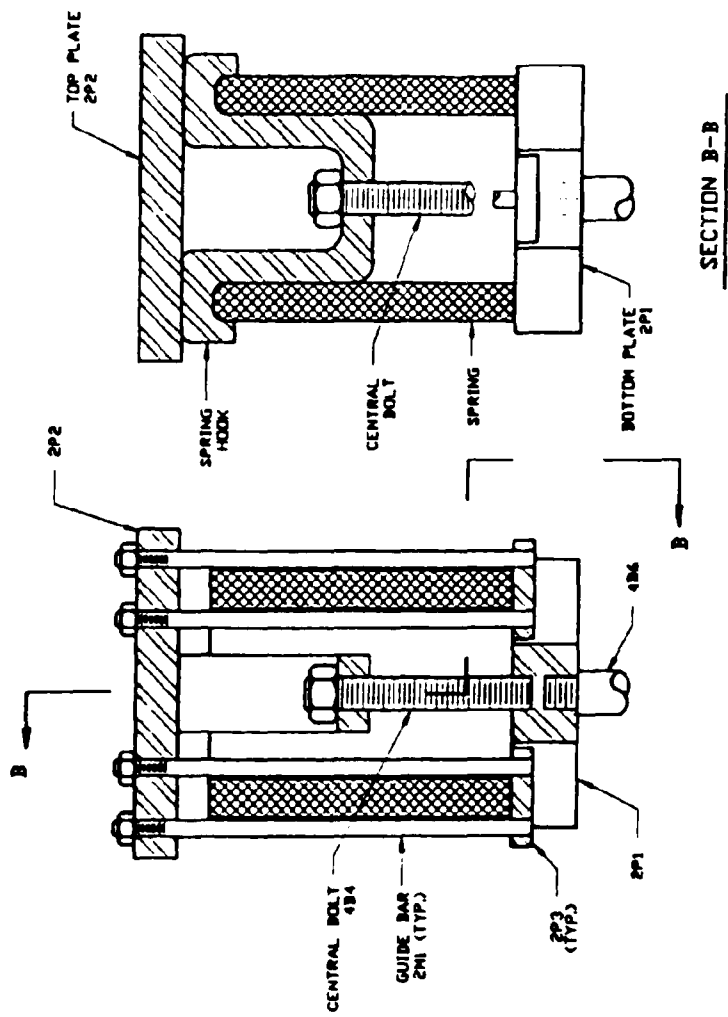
Spring Assembly in Displacement Control Device.
